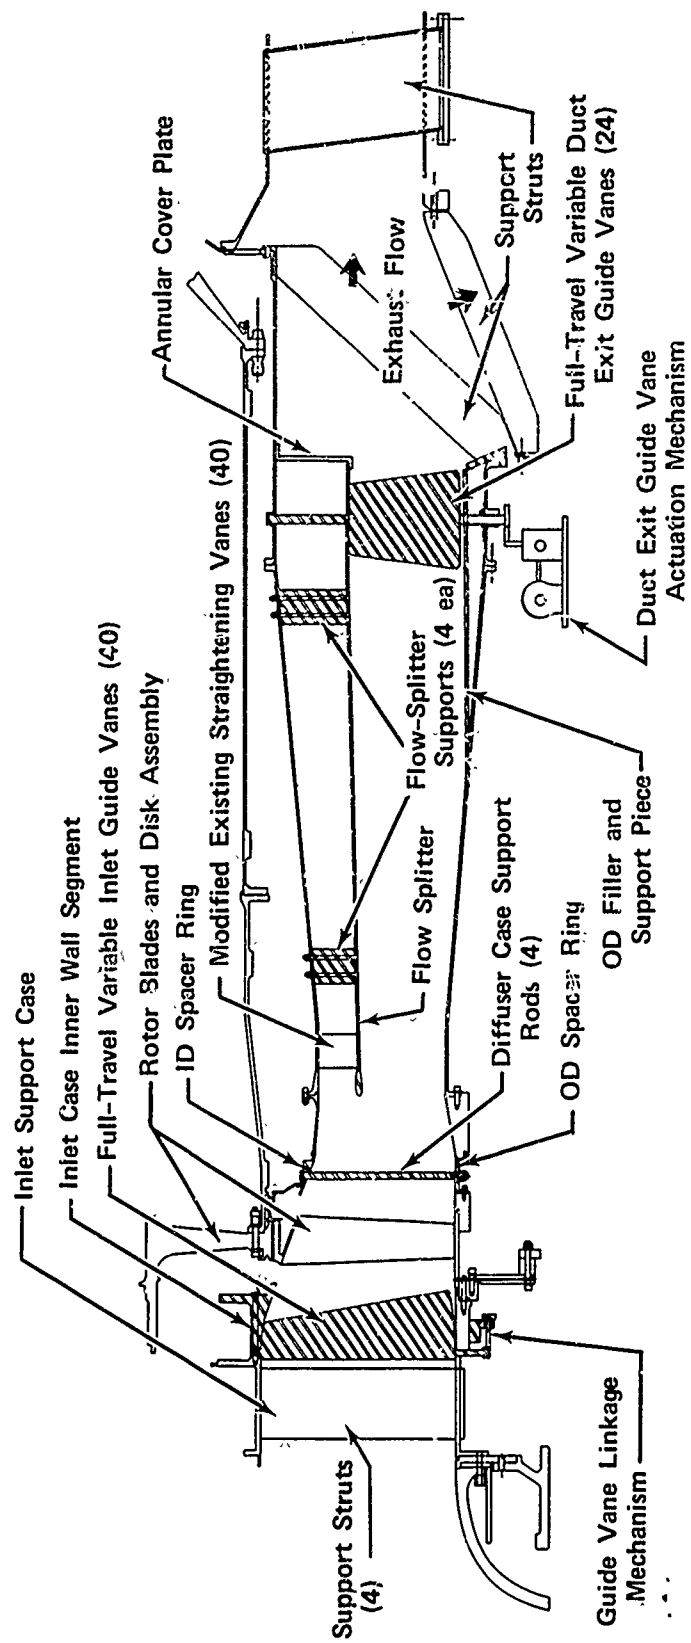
Sectional View of Low Hub-Tip Ratio Single-Stage Test Rig.
